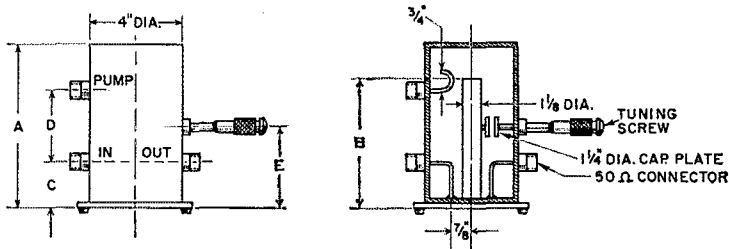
Sketch showing construction of a coaxial filter. Dimensions should be as shown at the right:
